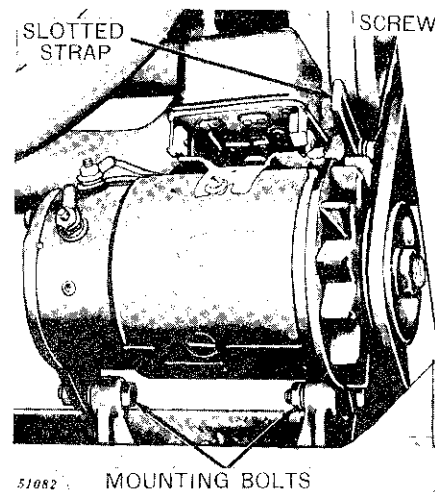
Generator Mounting Bolts and Strap Cap Screw for Belt Adjustment
